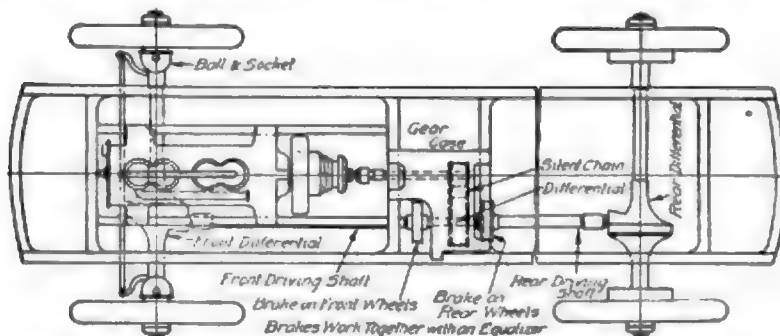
Layout of a four-wheel drive truck showing drive shaft arrangement to front and rear axle
